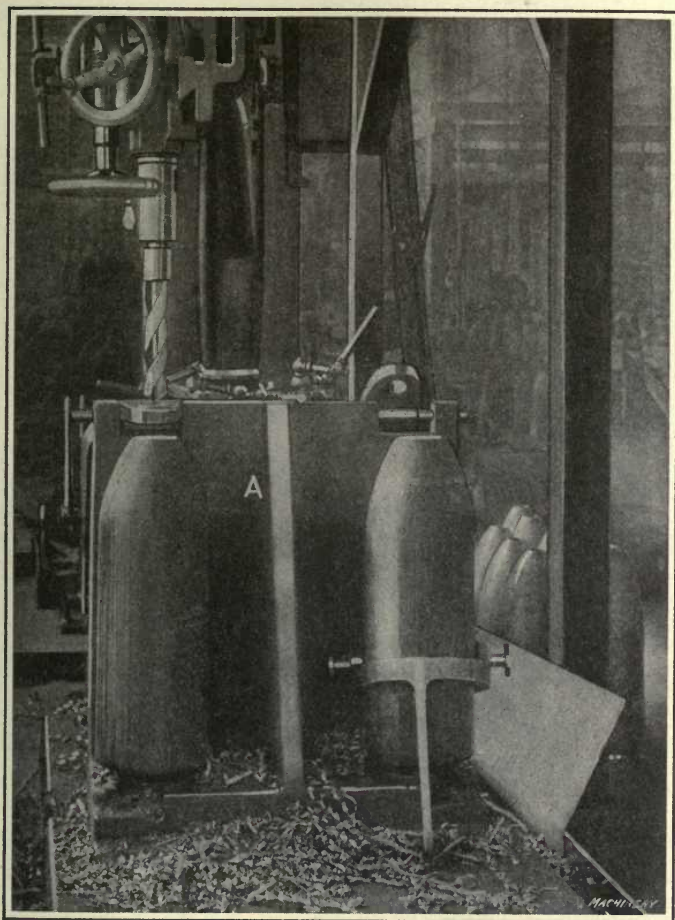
First Machining Operation on British 9.2-inch High-explosive Shell Forging—drilling Hole in Nose and facing
